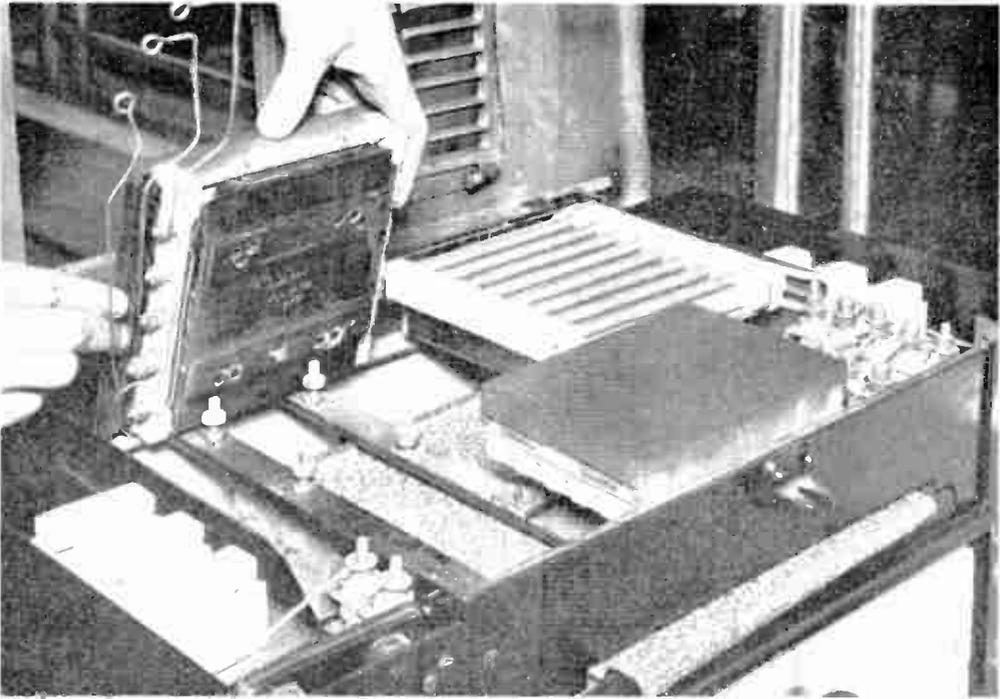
REMOVING THE HOT PLATE IN ONE PIECE AFTER DISCONNECTING THE SUPPLY WIRES.
